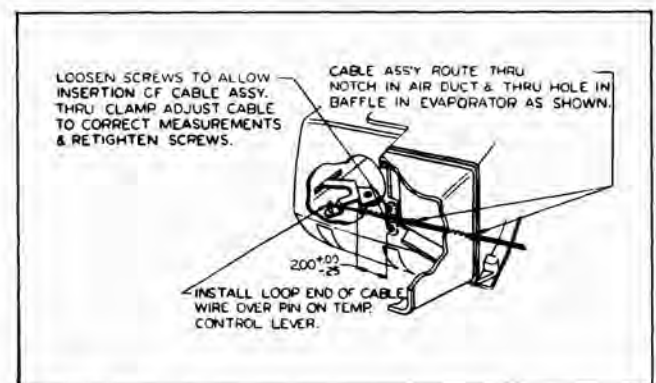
Tempest Temperature Control Cable Hook-up at Evaporator Housing
